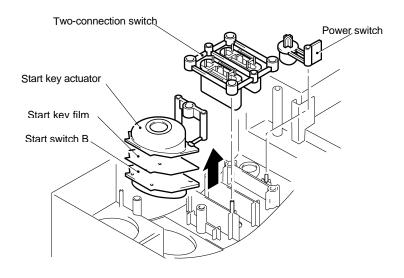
Removing the Switch PCB Assy (2)
